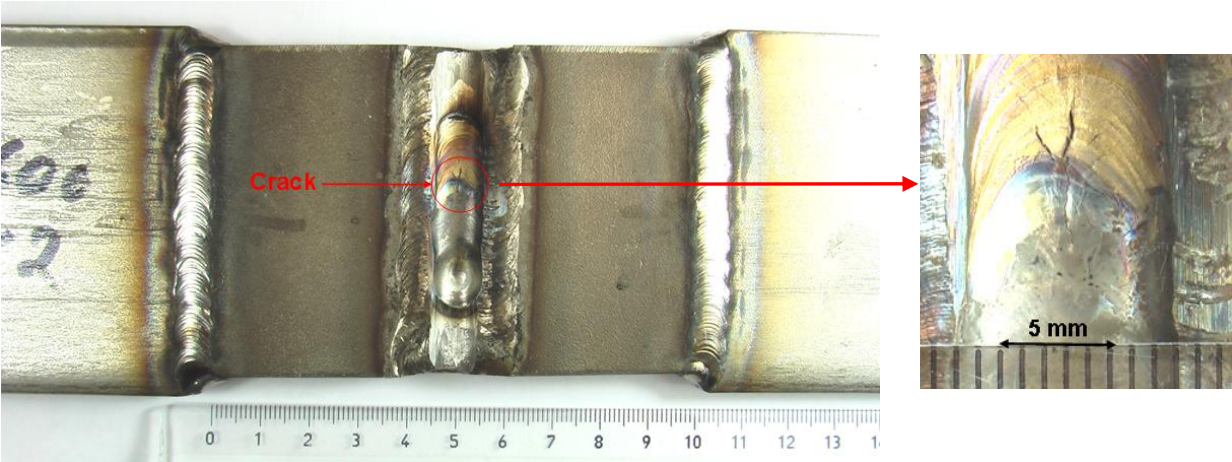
The specimens after trans-Varestraint testing for producing the hot cracks, and the final filling of the preparation resulting in flat specimens with hot cracks buried inside the weld metal.
